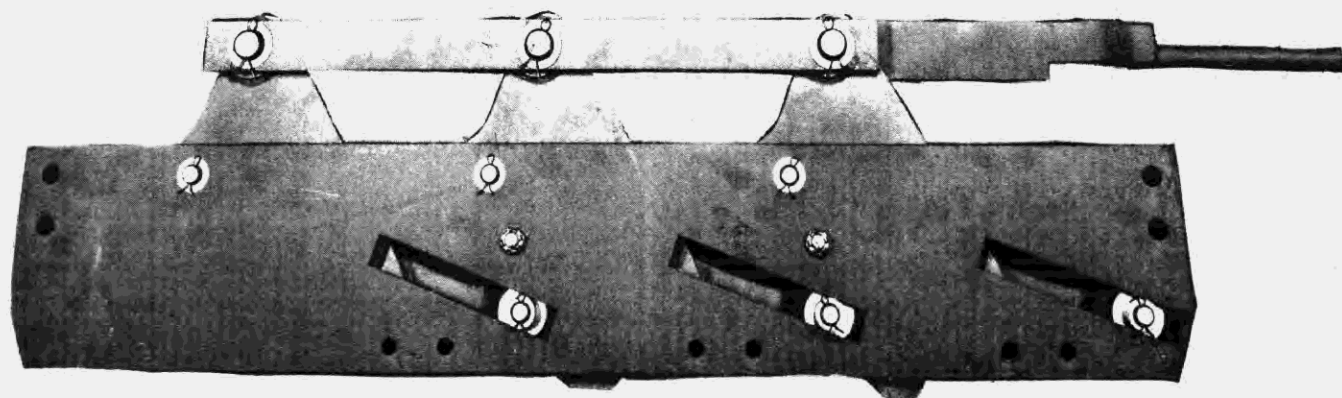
View of the Breaker Straight Line Linkage in the breaker partially-closed position just prior to assembly into the breaker dome.
